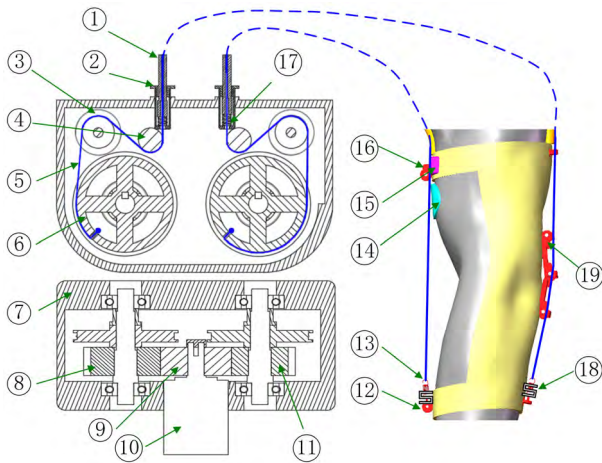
Schematics of the compliant tendon-sheath actuator unit (1-Outer sheath; 2-Pretension thread tube; 3-Tension sensors; 4-Guiding wheel; 5-Inner tendon; 6-Pulley; 7-Shell frame; 8-Large driven gear; 9-Driving gear; 10-Servo motor; 11-Small driven gear; 12-Anchor point; 13-Series tension spring; 14-SEMG sensor; 15-IMU sensor; 16-Sheath support; 17-Parallel pressure spring; 18-Force sensor; 19-Guidance mechanism).
